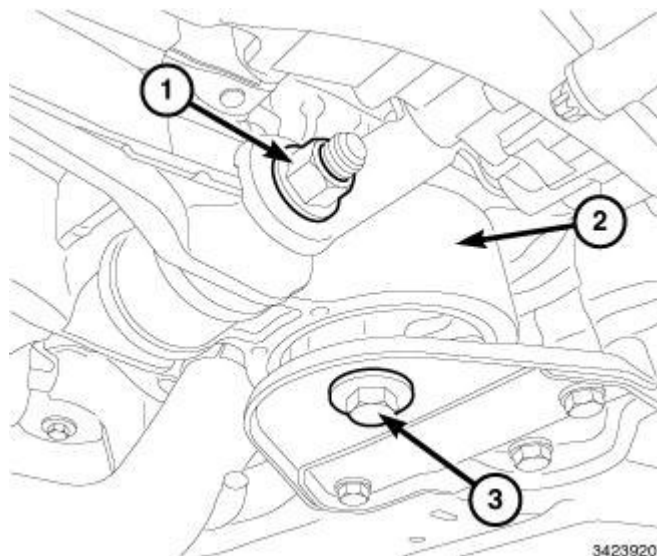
Support Bracket-To-Engine Mount Bracket Nut, Rear Mount & Bolt
